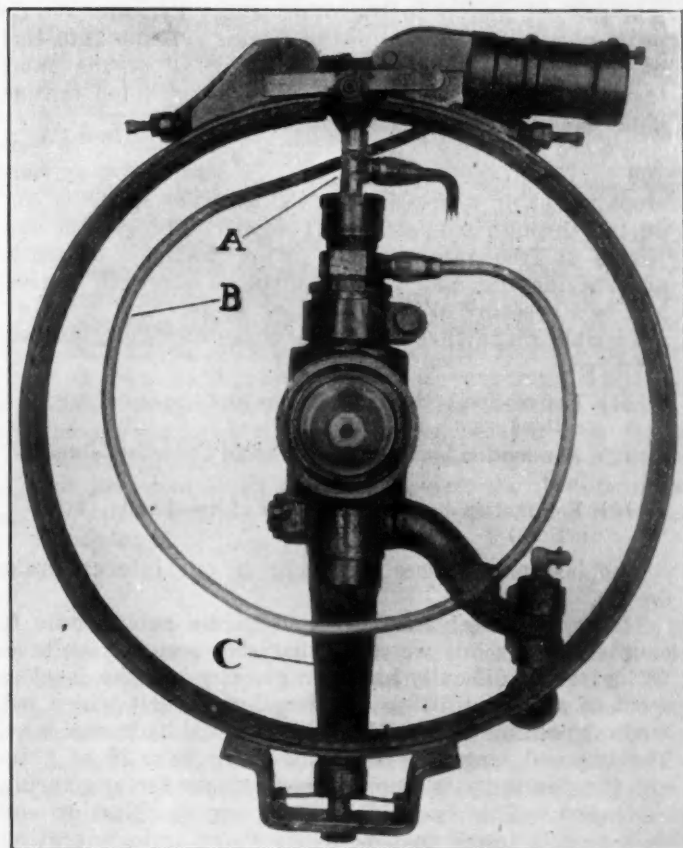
DETAILS OF CONSTRUCTION SHOWING THE RELATIVE POSITIONS OF THE SWIVEL JOINT, THE KNUCKLE-PIN AND THE COIL THAT TAKES UP THE BAND MOVEMENT
